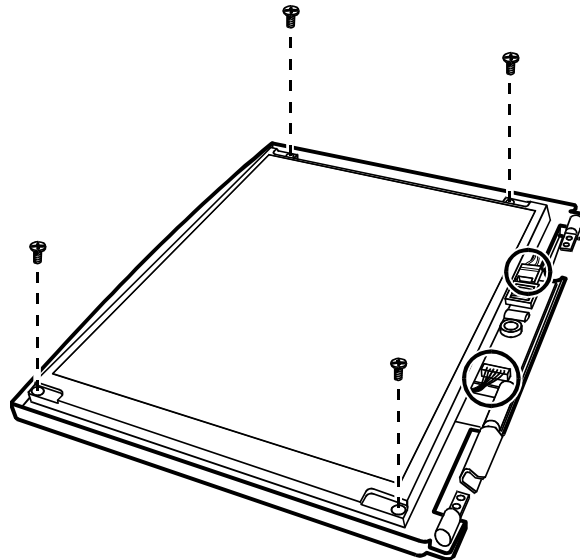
REMOVING THE FLAT PANEL SCREEN
